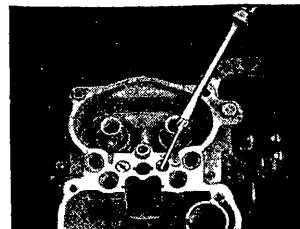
Install low speed jet and by-pass bleed plugs. Jets must seat in casting
